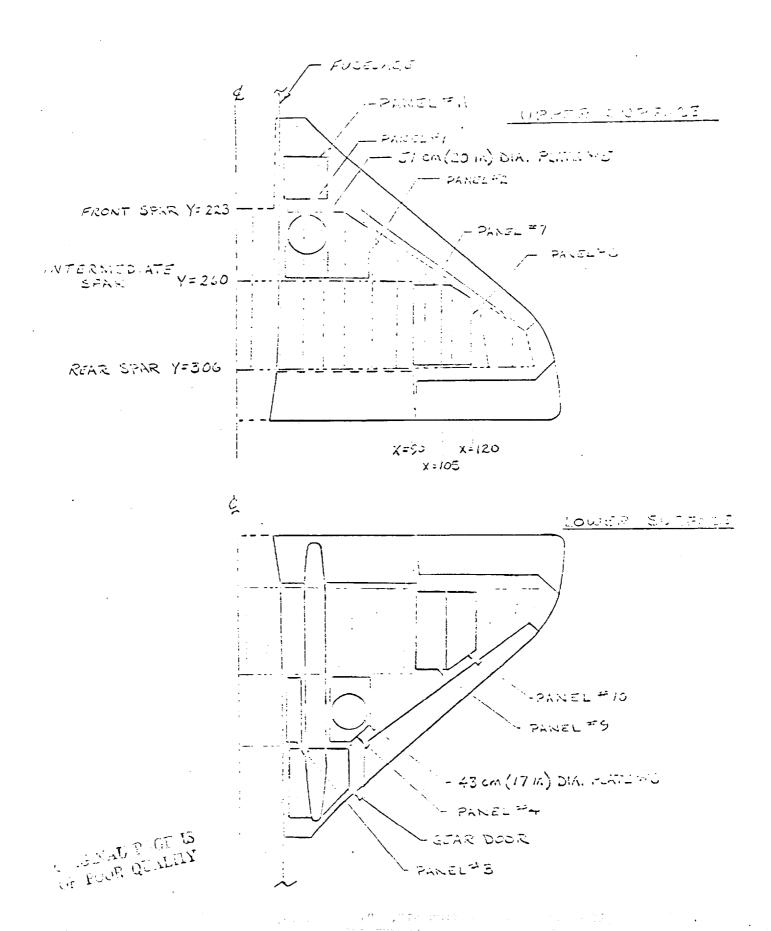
HOLE CONFIGURATION #11. PANEL 11 REMOVED AND GEAR DOOR OPEN
